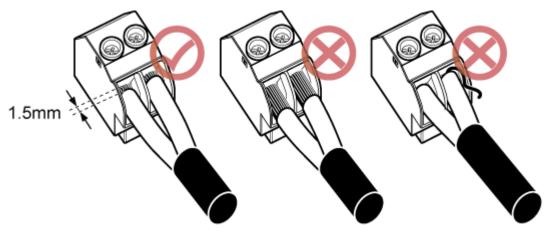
Inserting core wires into the tool-less female connector (pressfit type)
